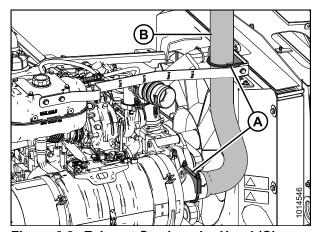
Exhaust Stack under Hood (Charge Air Cooler Tube and Exhaust Shroud Removed for Clarity)
